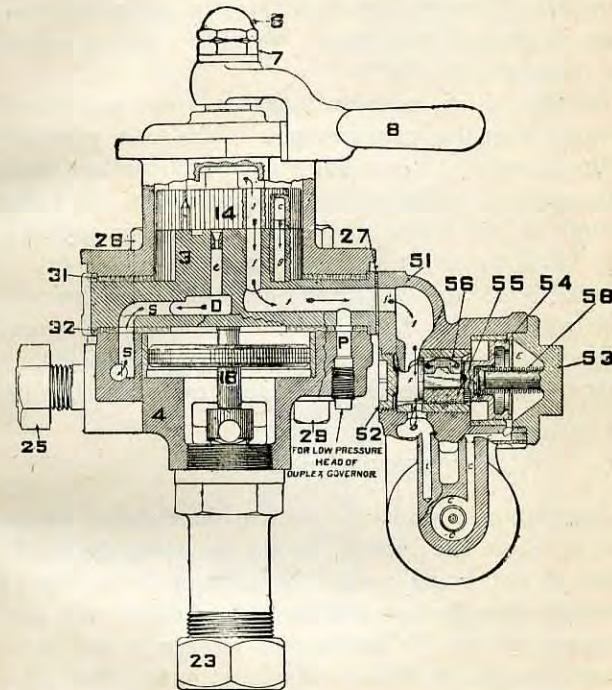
G-6 Engineer's Brake Valve. Running Position. Side View.
